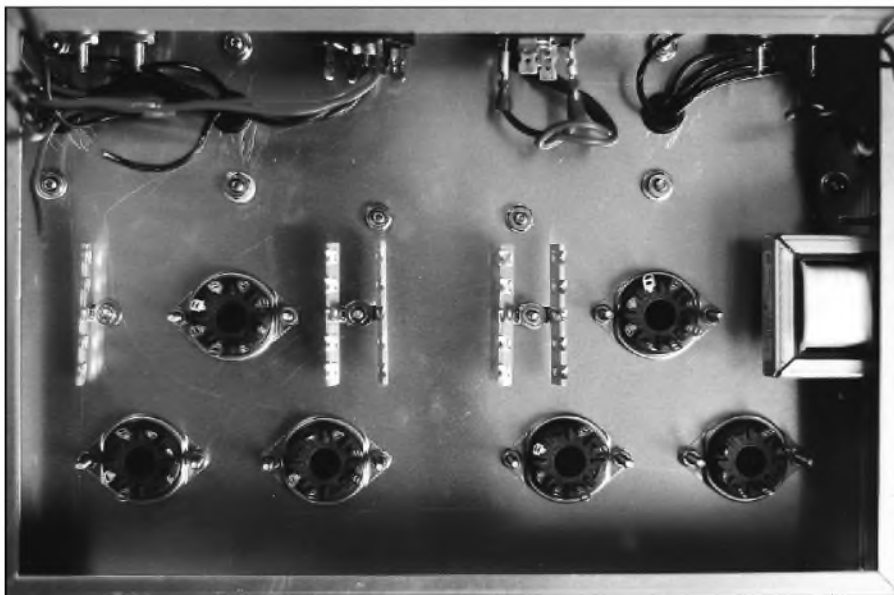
Underside of new chassis box with sockets, terminal strips, and power-supply components mounted.
